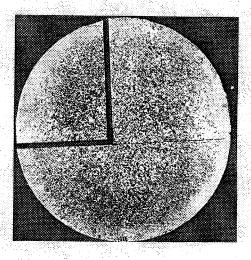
Macrostructure of a 480 mm (19 in.) diam type 406 stainless steel forged bar produced from a 1 m (40 in.) diam ingot. Courtesy of G.F. Vander Voort, Carpenter Technology Corp.
